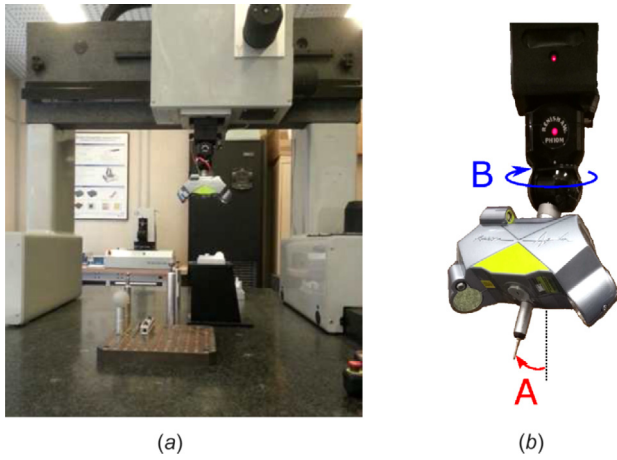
Configuration involving a CMM and hybrid sensor: (a) view of the CMM, (b) scanner KA50 composed of a touch probe and laser sensor mounted on a Renishaw PH10 head.
